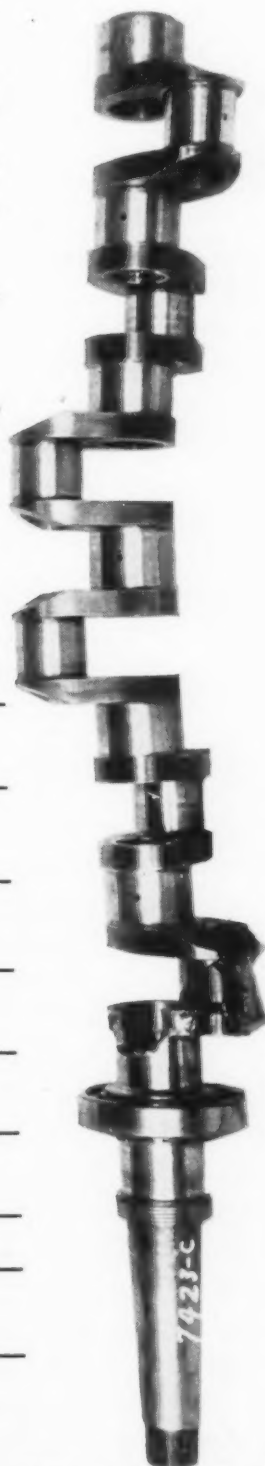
Photograph of Failed Crankshaft Showing Failure and Location of Test Specimens. (Greatly Reduced.)
